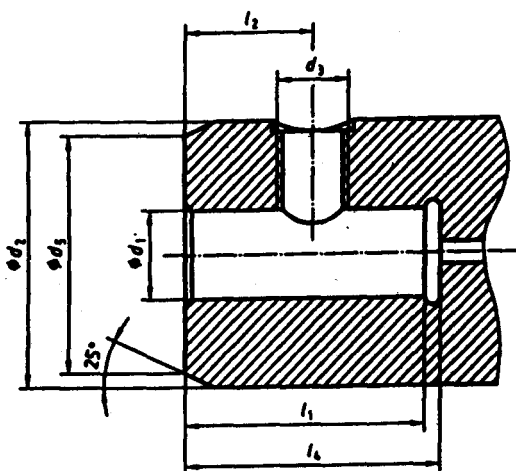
CHUCKS FOR TOOL SHANKS WITH SINGLE FLAT
